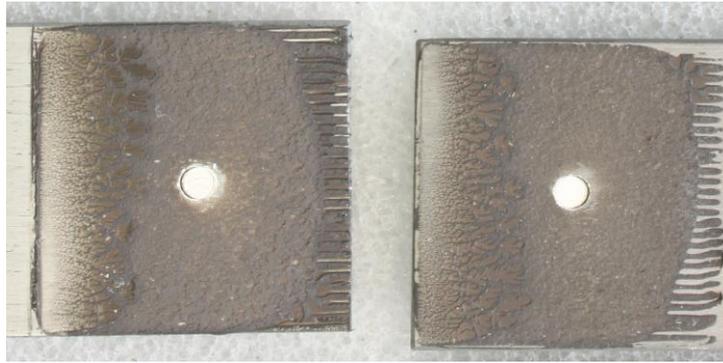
Typical fracture of a joint with visible dark sealant area and a fastener failed surface.
